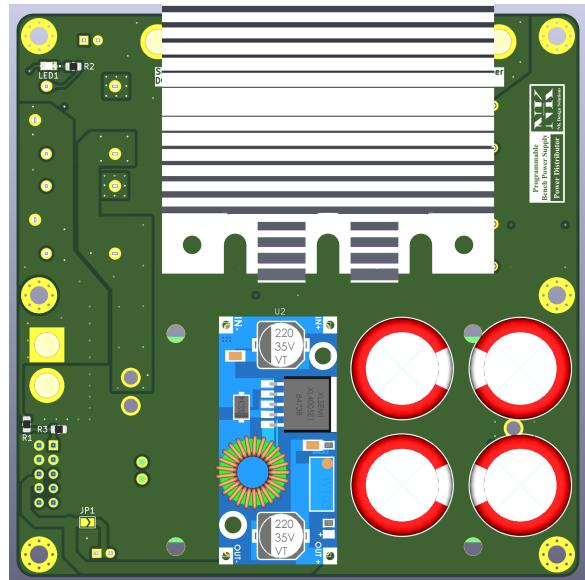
Power Distributor PCB 3D View - Bottom View
